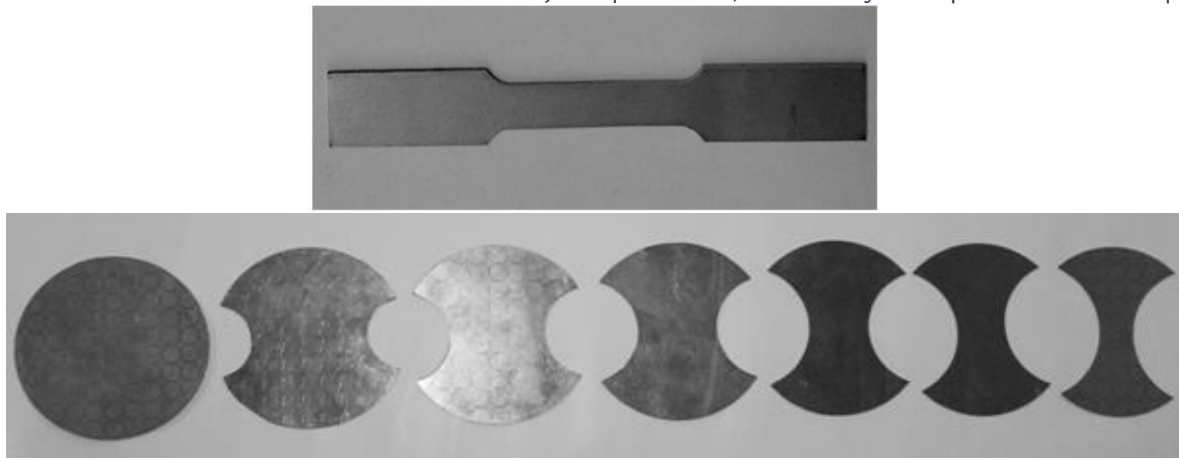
Sample specimens a)Tensile test b)Nakazima test
